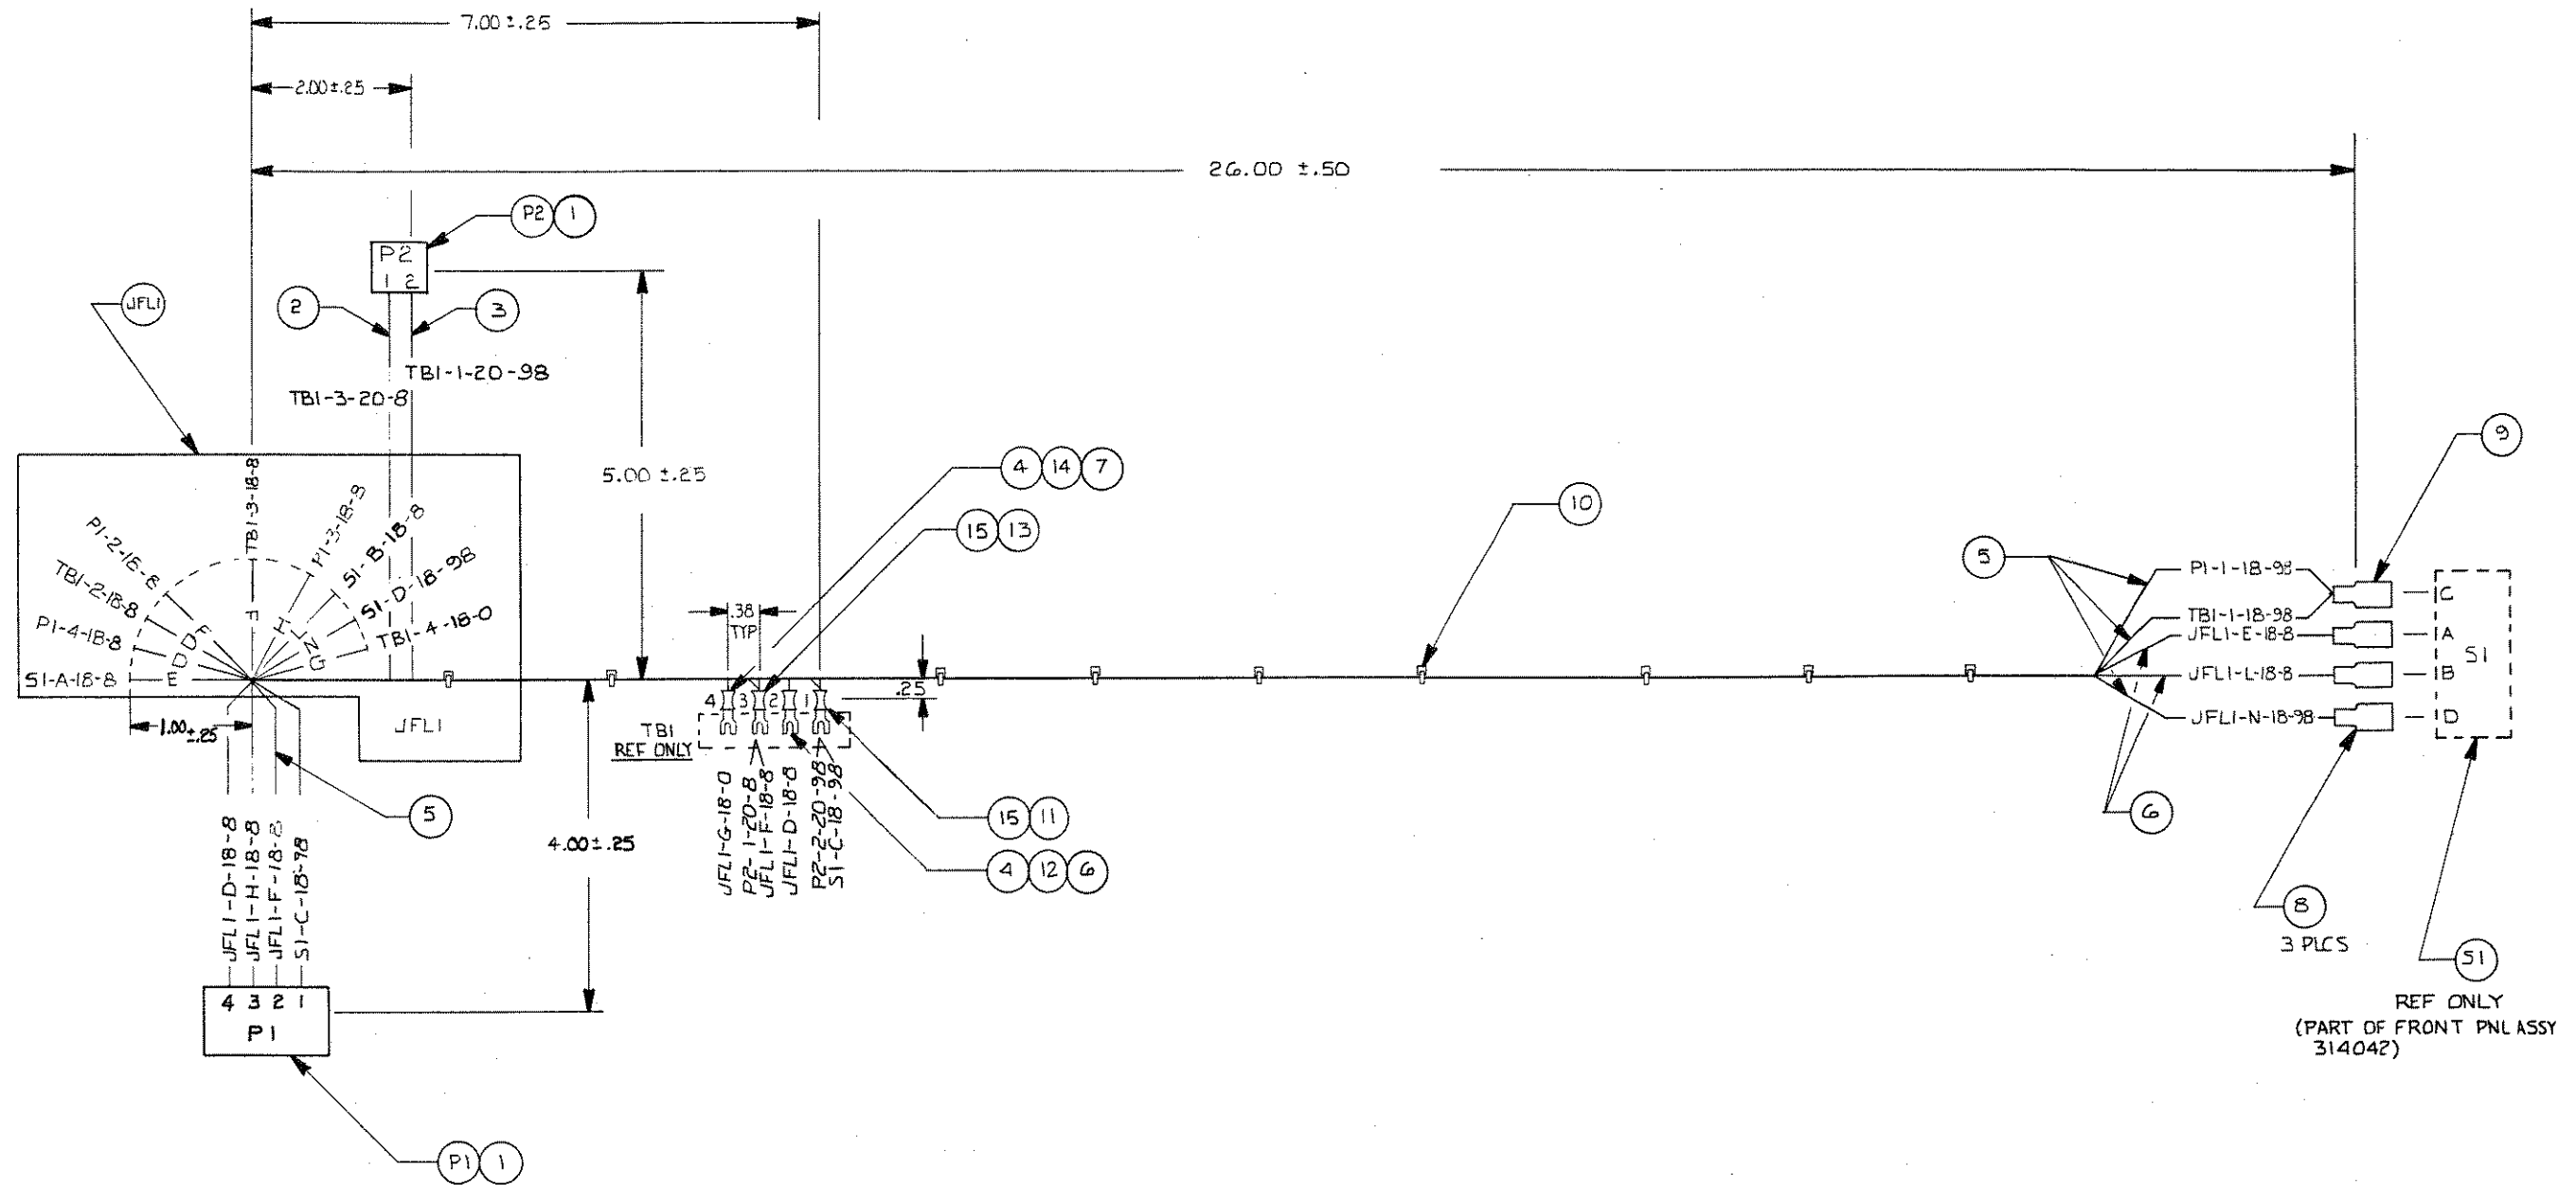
Cable Assembly (A12W1), AC Power Harness
